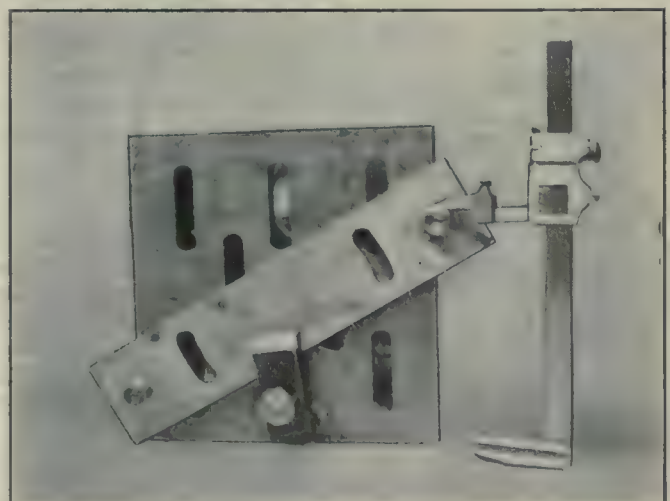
SETTING "SINE" BAR TO DESIRED ANGLE.
